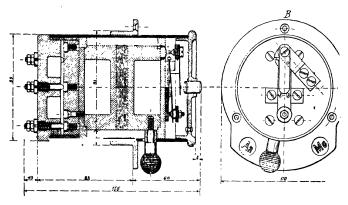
Section and End View of Nieuport Dual Coil and Switch.
